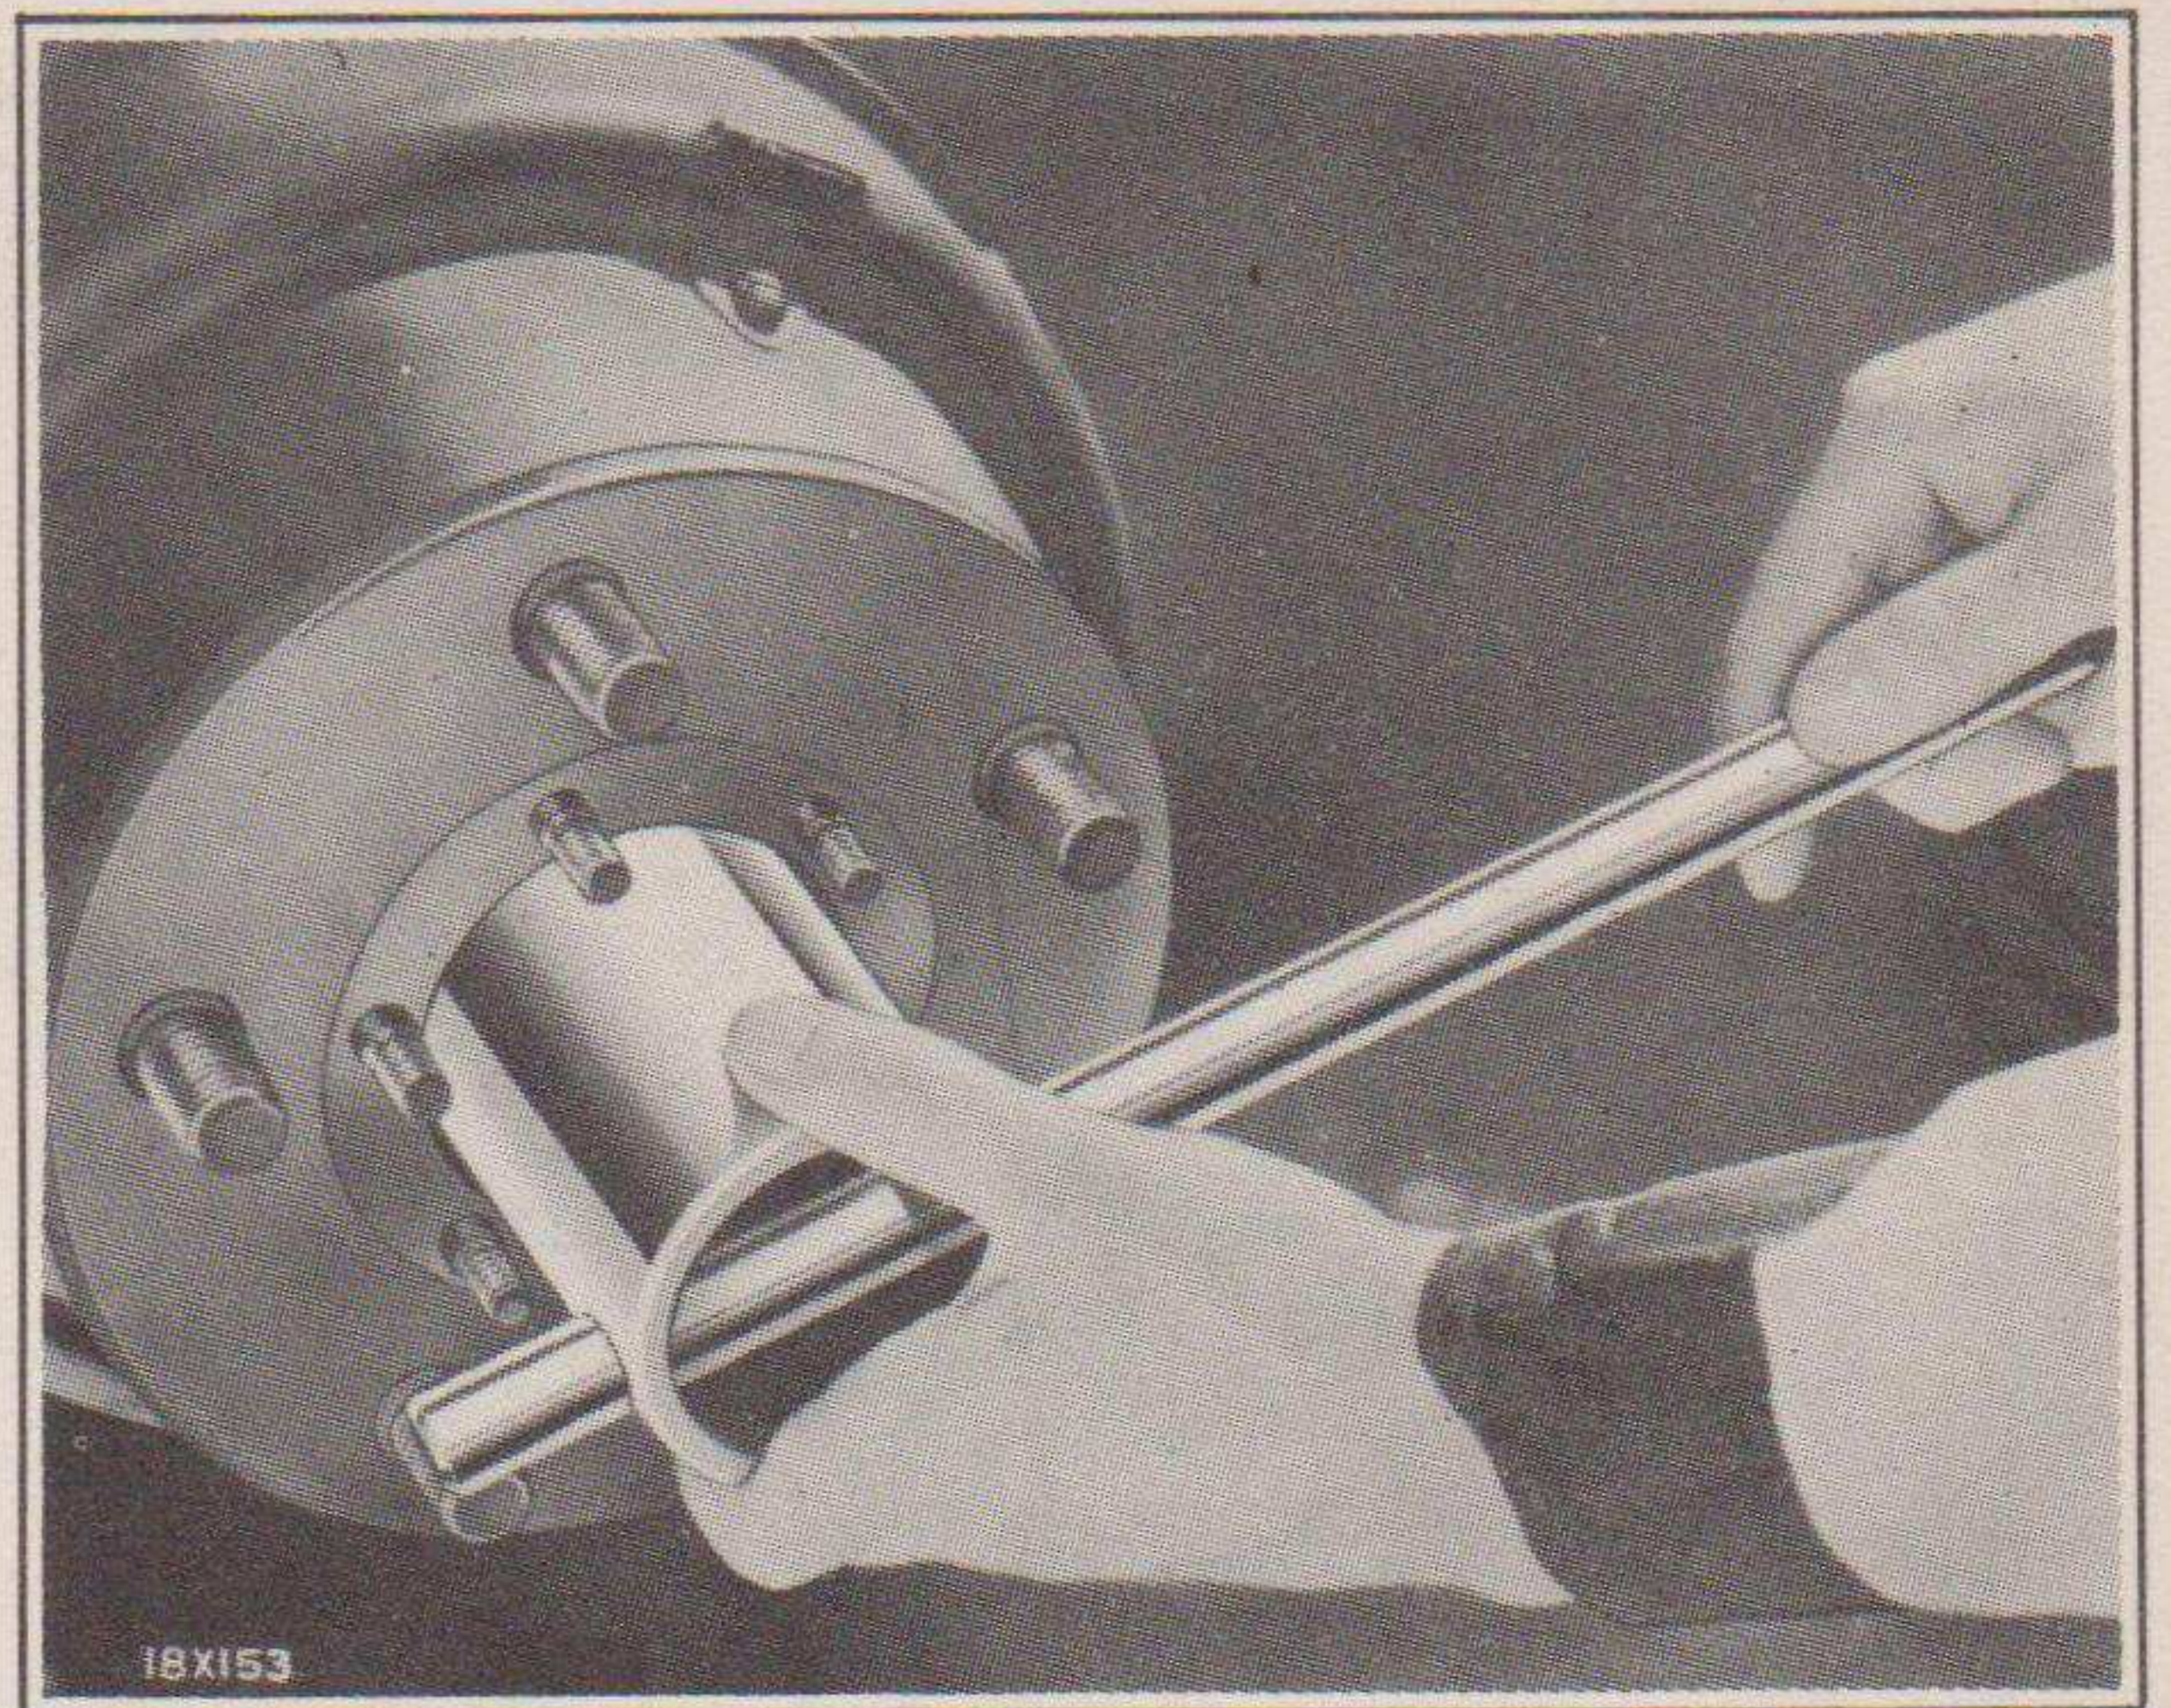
Removing Front Wheel Bearing Adjusting Nuts or Adjusting Bearings (Tool DD-824)
